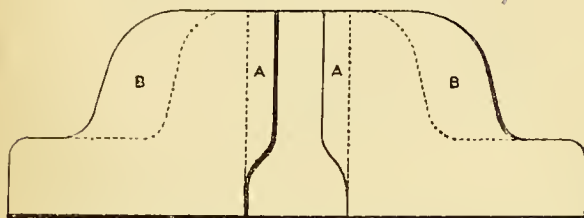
FRONT ELEVATION OF LARGER ROUTER WITH SECTION THROUGH WOOD-HOLE OF ROUTER
